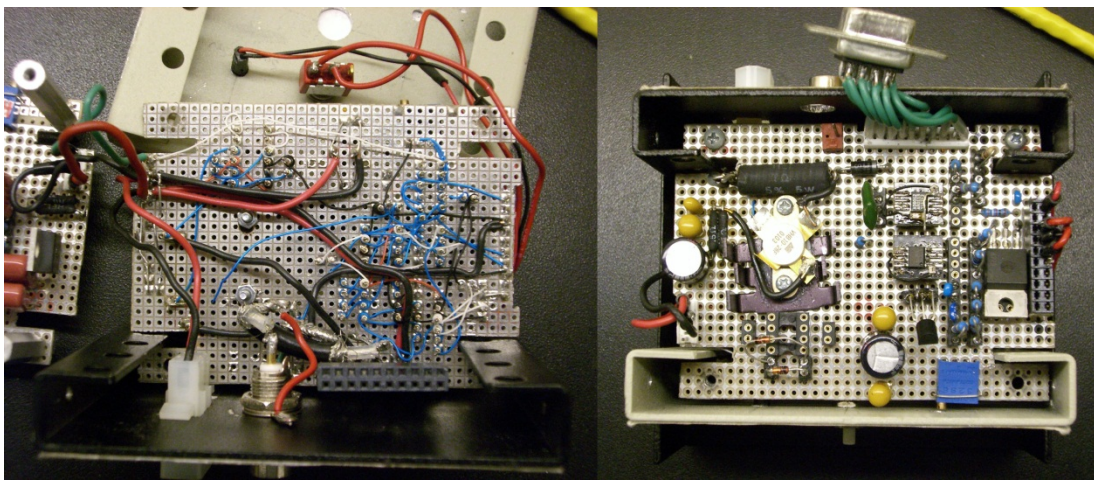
Picture of the interior of the custom built laser driver. Bottom side (left) and top side (right) of laser driver circuit board used for modulating an 810 nm laser diode (*JDSU, SDL-2372, 2W*). As can be seen on the left-hand side, the connections of the components are established by the wire wrap method. The input BNC connector can be seen on the lower black housing panel in the left picture, next to the white power connector. On the right-hand side, the D-Sub connector (green wires – top of picture) for the laser diode can be seen.
